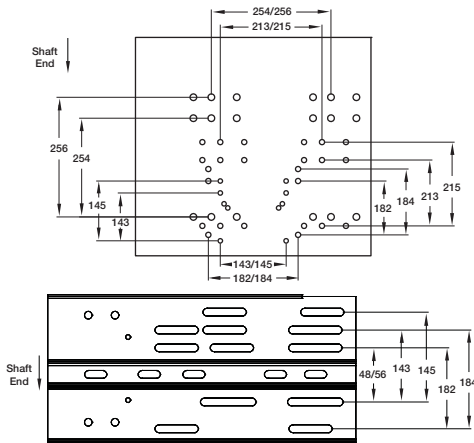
Motor Mounting Positions Based on Motor Frame Size
